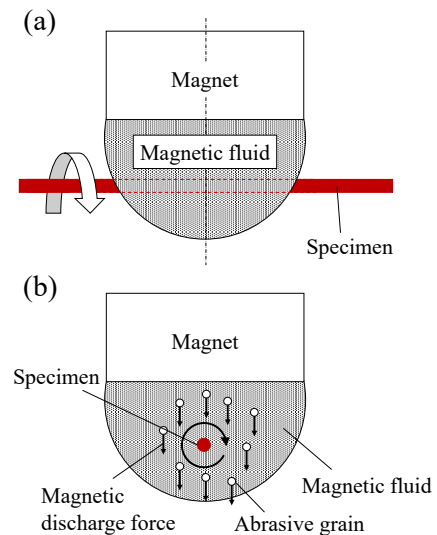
Schematic representation grinding showing a specimen subjected to magnetic fluid grinding, (a) Front view and (b) Sectional view.
